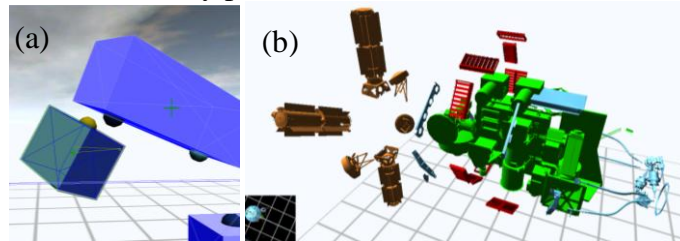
Virtual Assembly techniques: *Assembly by proximity* (a) and *Disassembly* (b)
